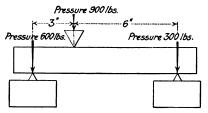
Shows a mechanical principle which should be applied when clamping work.
